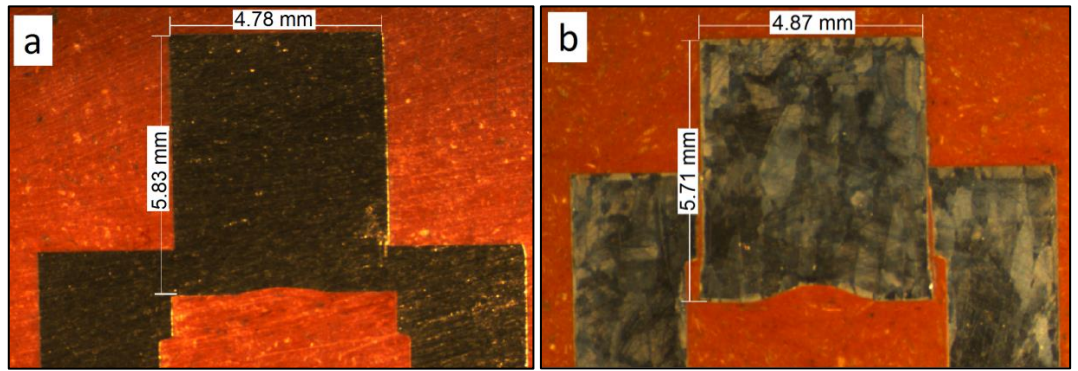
The cross section of a) an undeformed sample and b) a sample deformed for 2 mm at the launch pressure of 3 bar and the striker speed of 6 m/s
